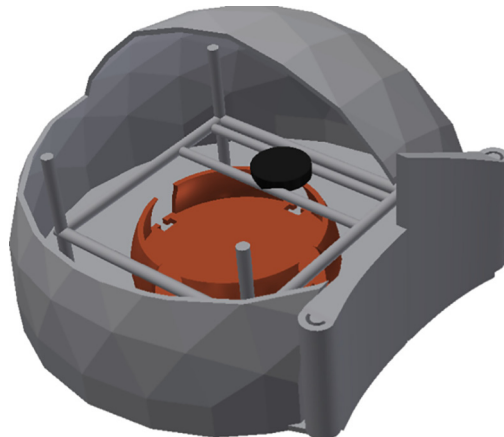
3D printer housed in the construction dome ([Kading and Straub, 2015](#)).
